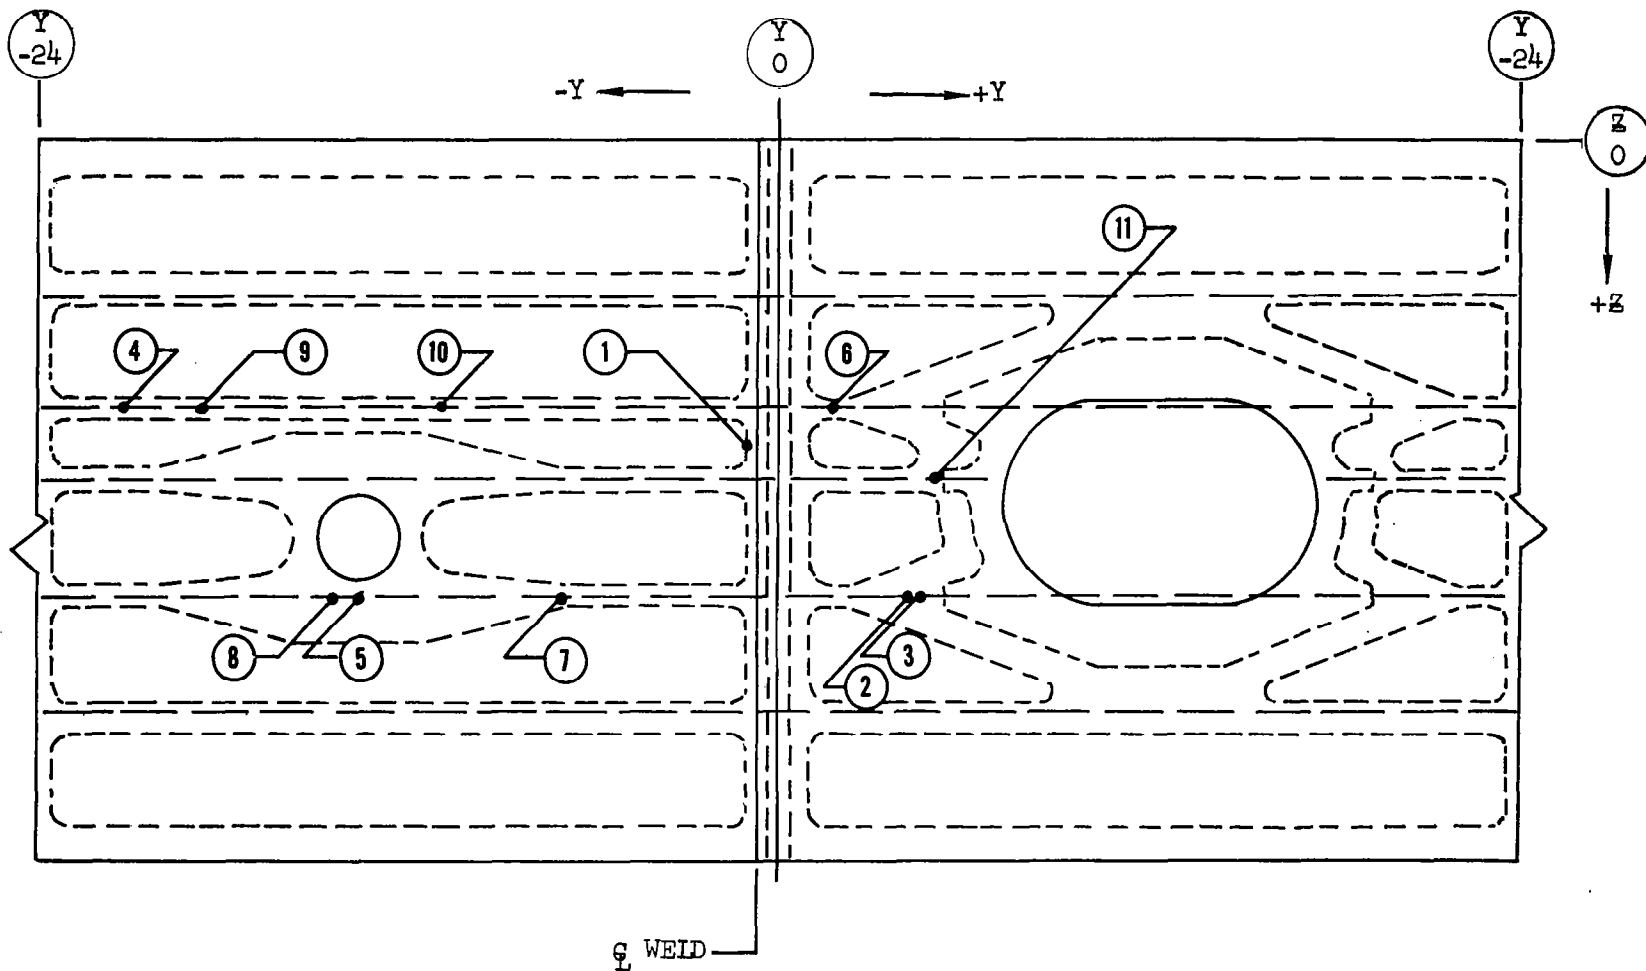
Fatigue Crack Locations in Specimen No. 1
